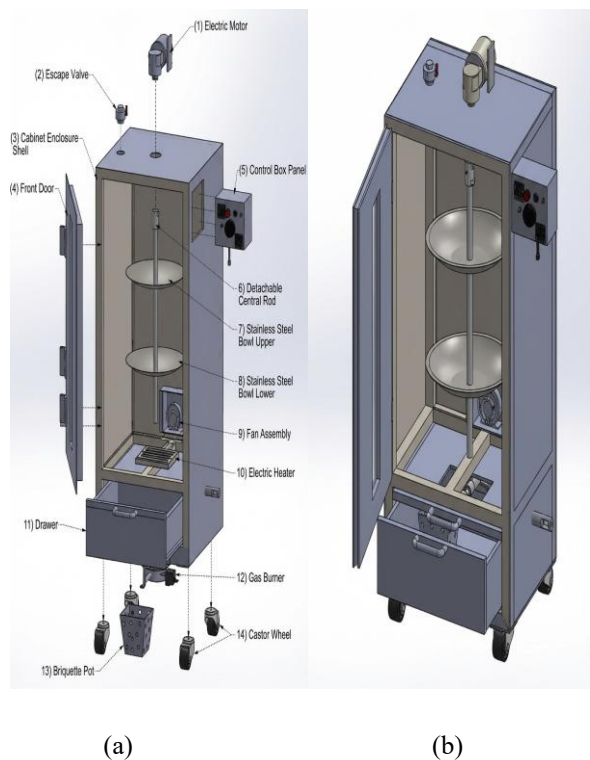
Exploded (a) and Isometric (b) views of the Multifunctional Thermal Machine
